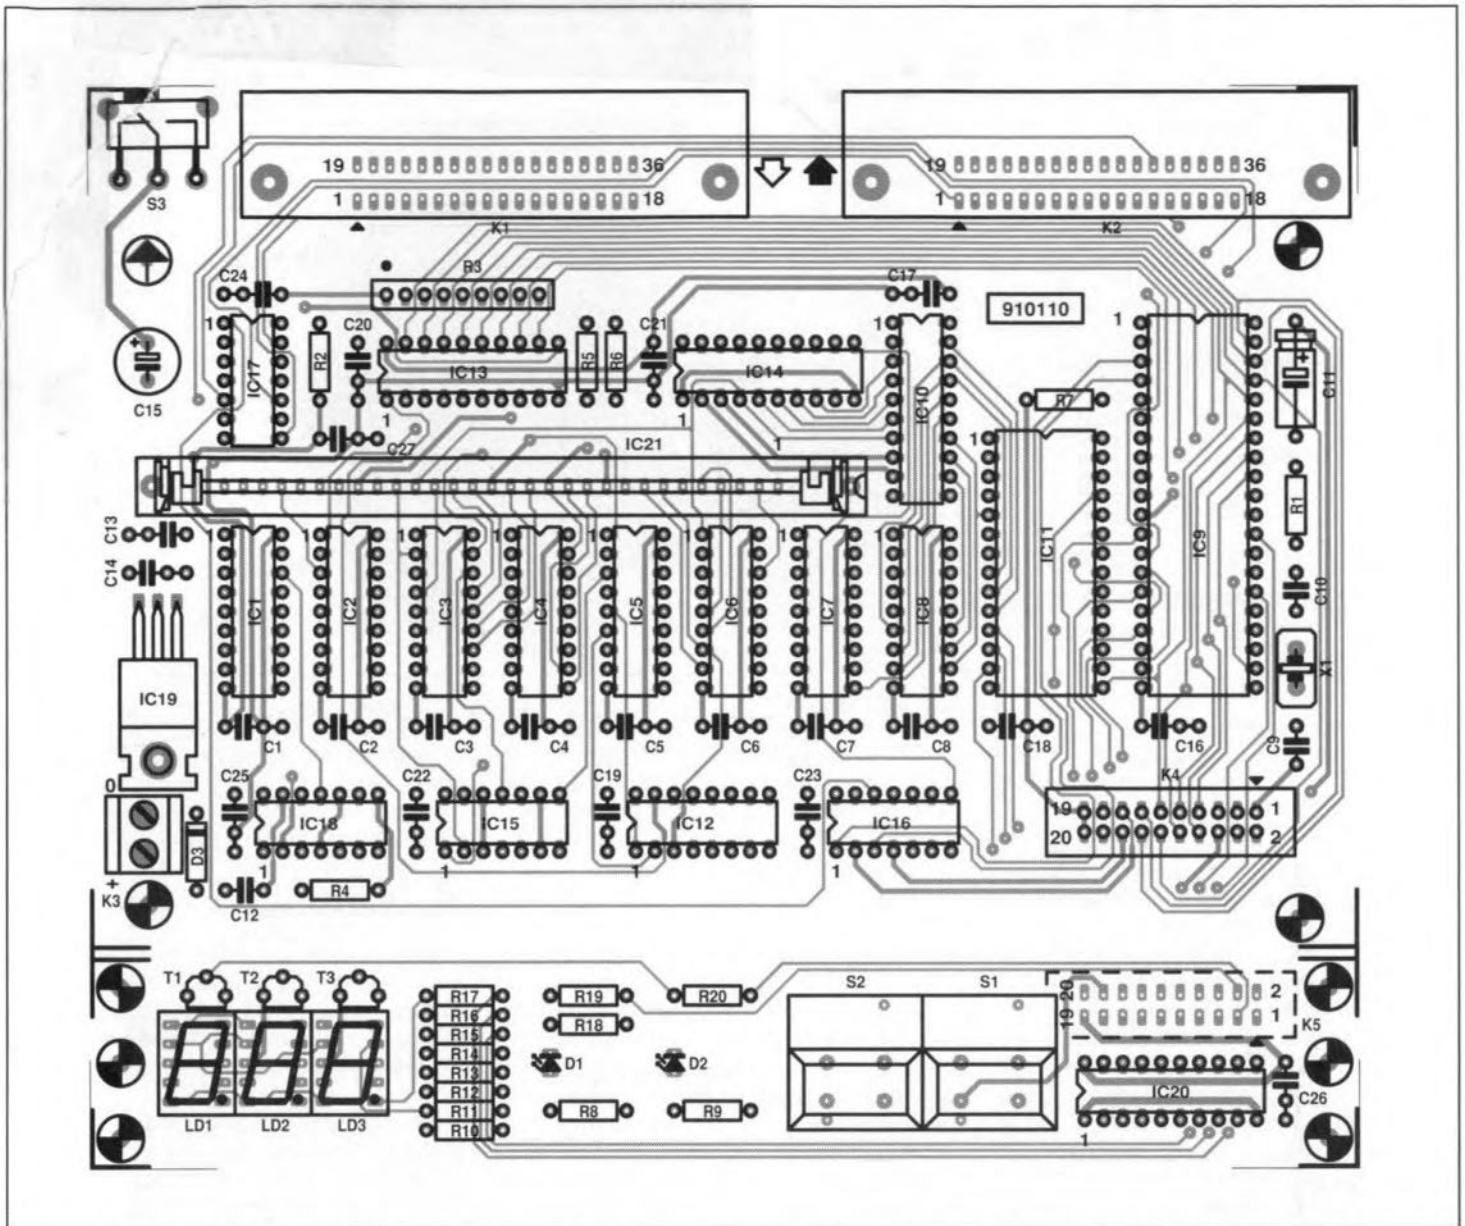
On previous page: track layouts (mirror images) of the component side and the solder side of the double-sided through-plated PCB. Above: component overlay.
